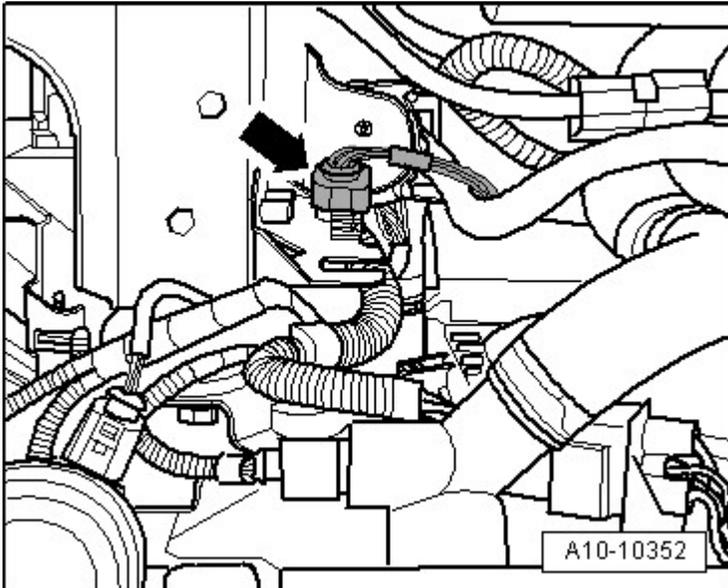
Identifying Lower Left Longitudinal Member Electrical Connector
